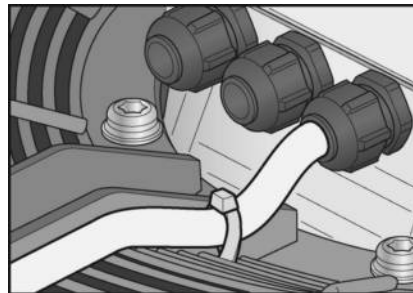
Fan installed lying flat, cable routed in a U-shaped loop.
